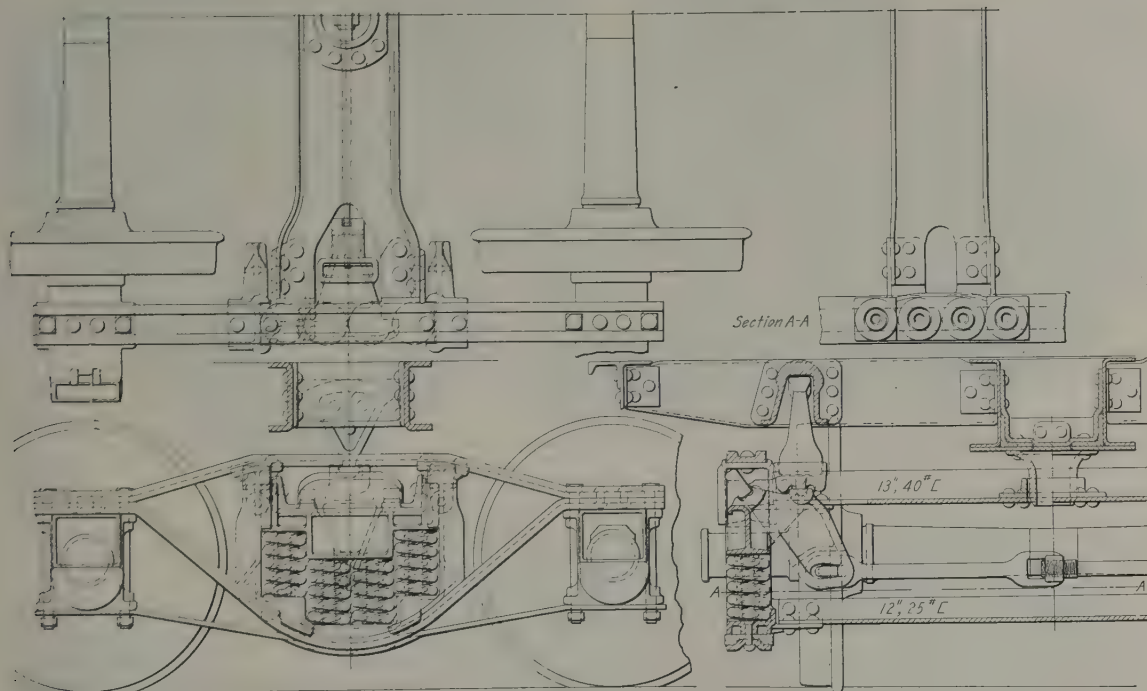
Summers Balanced Side-Bearing Truck. Summers Steel Car Company.
